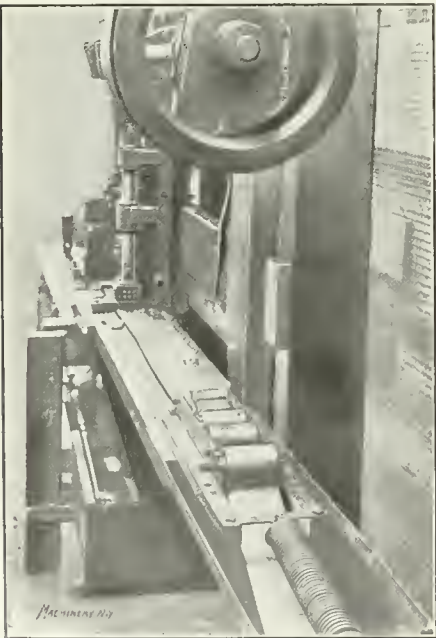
Edge Turning Rolls used on the Automatic Machine for Edging the Fin Strips
